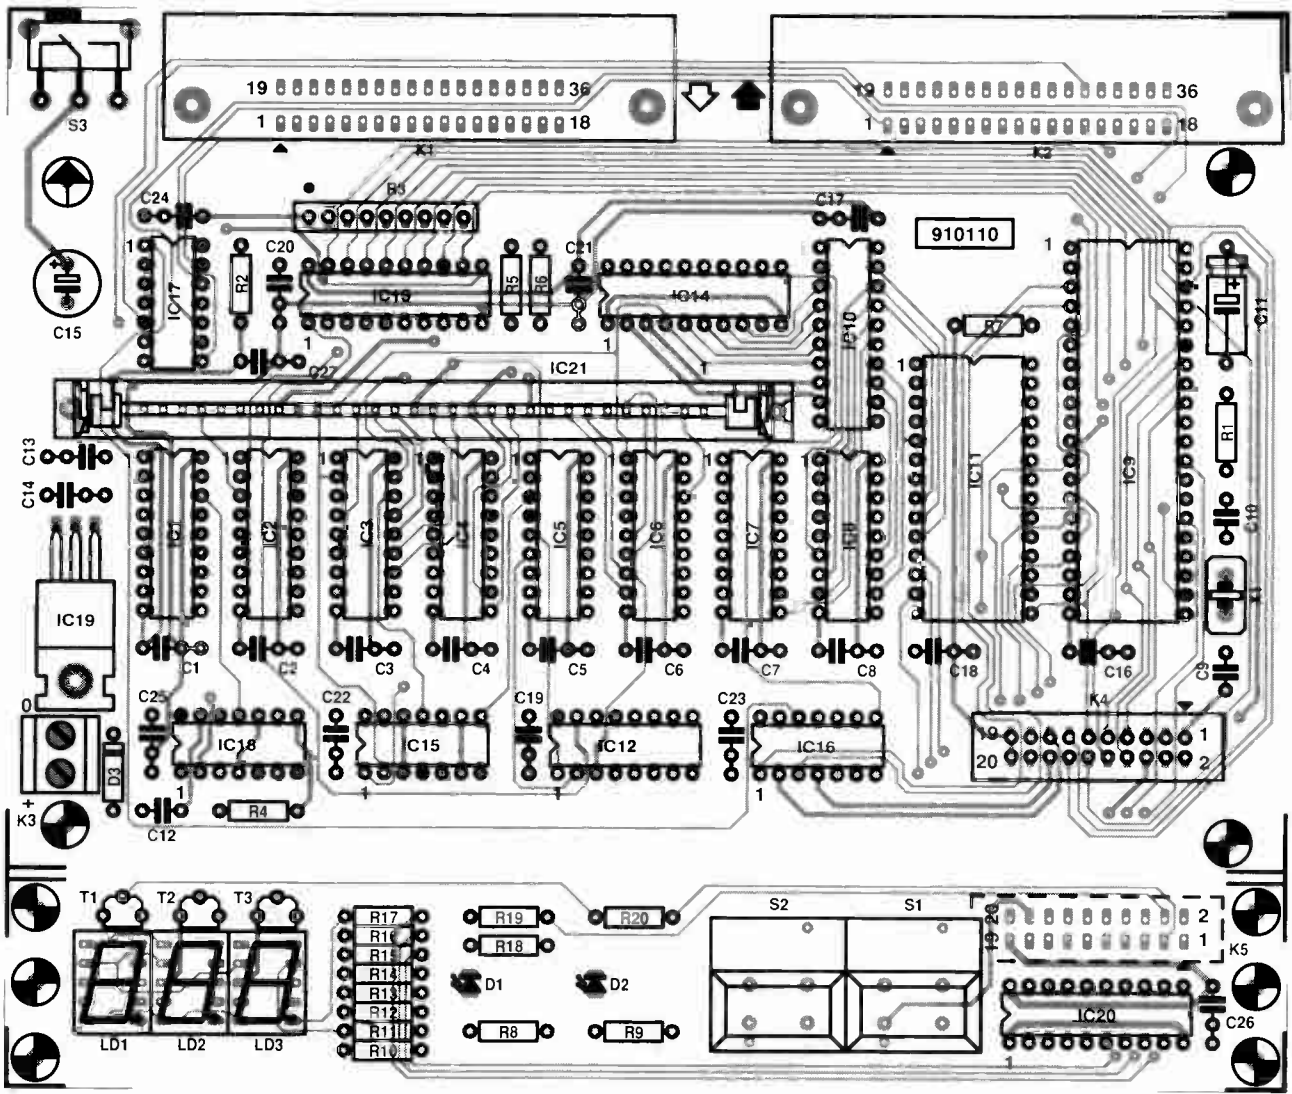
On previous page: track layouts (mirror images) of the component side and the solder side of the double-sided through-plated PCB. Above: component overlay.
